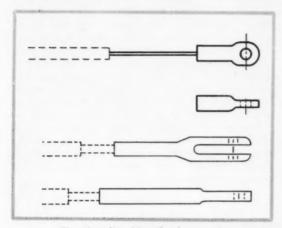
Adjustable end rod on a multiple-strand flexible cable.
